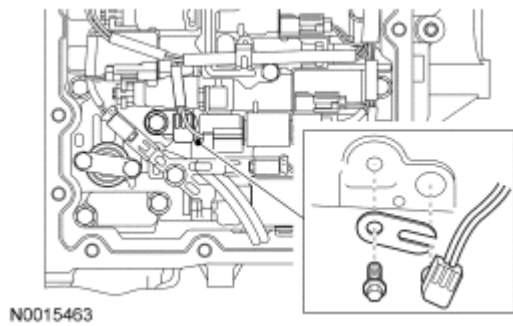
Identifying Transmission Fluid Temperature Sensor, Bolt & Lock Plate
